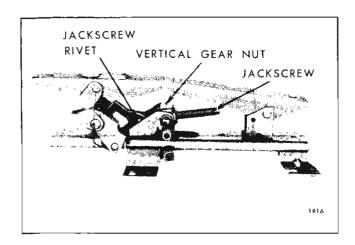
H8—Front Seat Adjuster Four-Way Tilt
